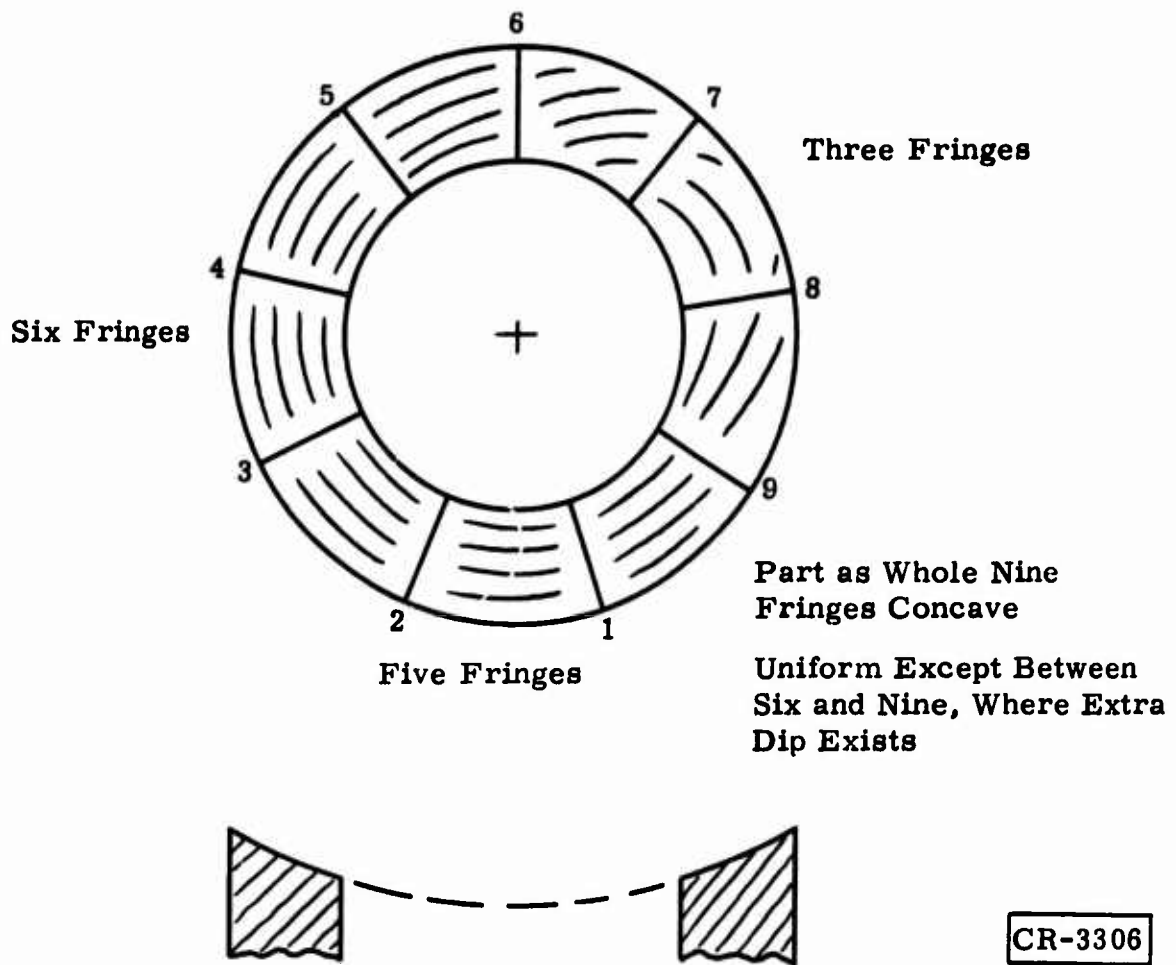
Thrust Bearing at Nonequilibrium (60°C)
